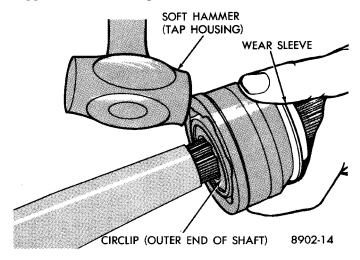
Outer C/V Joint Removal from Interconnecting Shaft
